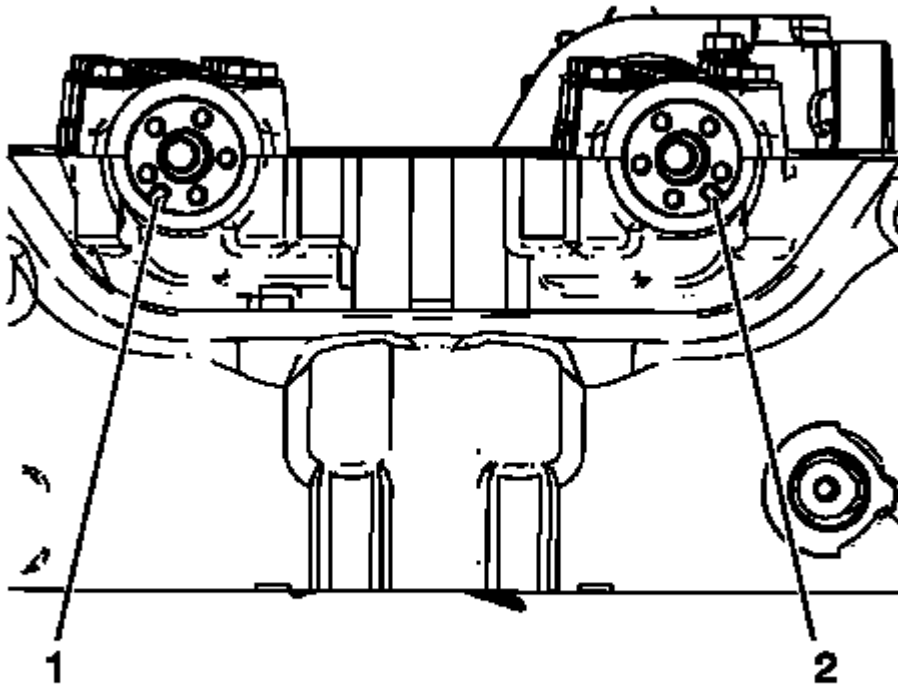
Identifying Proper Exhaust/Intake Camshaft Alignment positions
